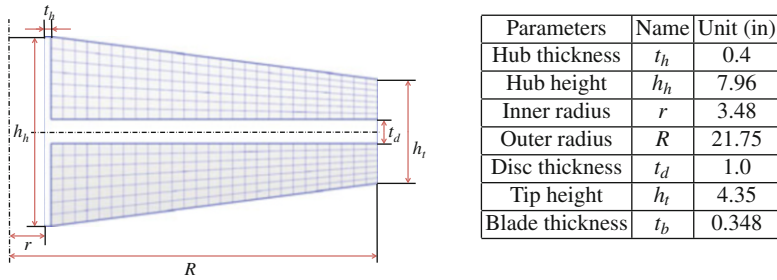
Left: Rotor cross-section with dimensions. Right: Arresting gear rotor dimensions.
